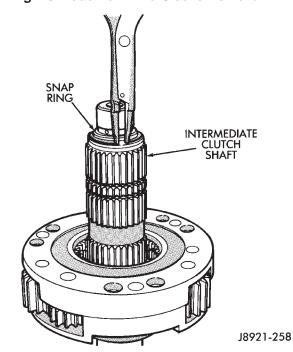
Intermediate Clutch Shaft Snap-Ring Removal
